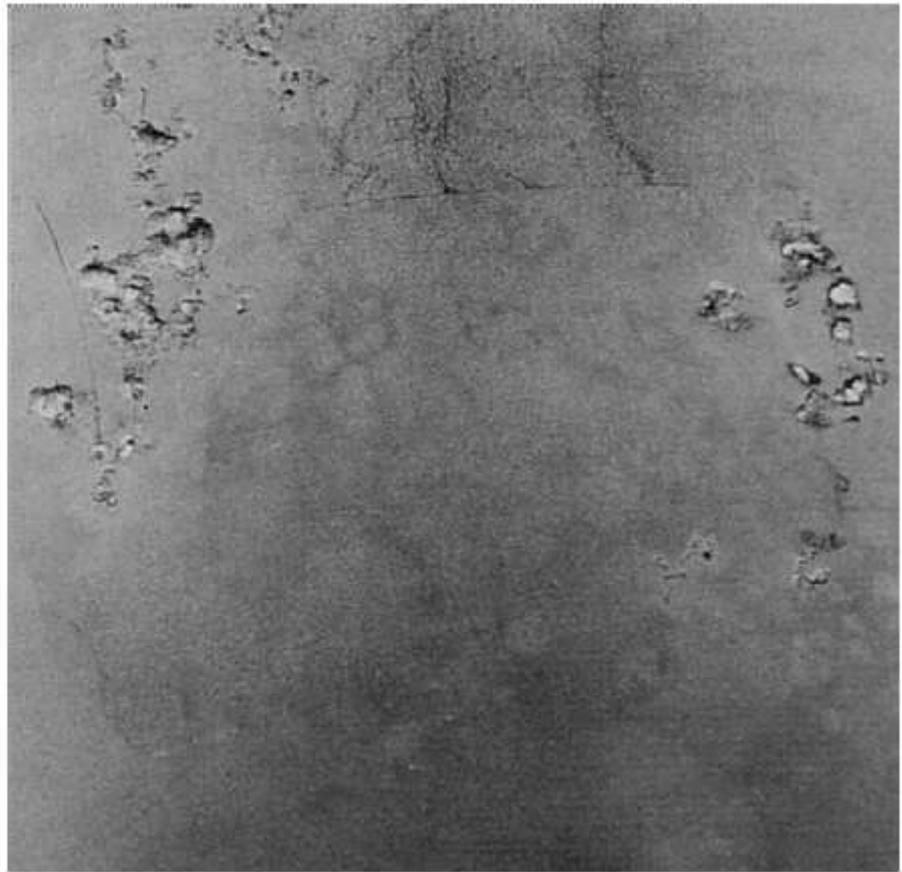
Pit corrosion in the cylinder sidewall distant view.
